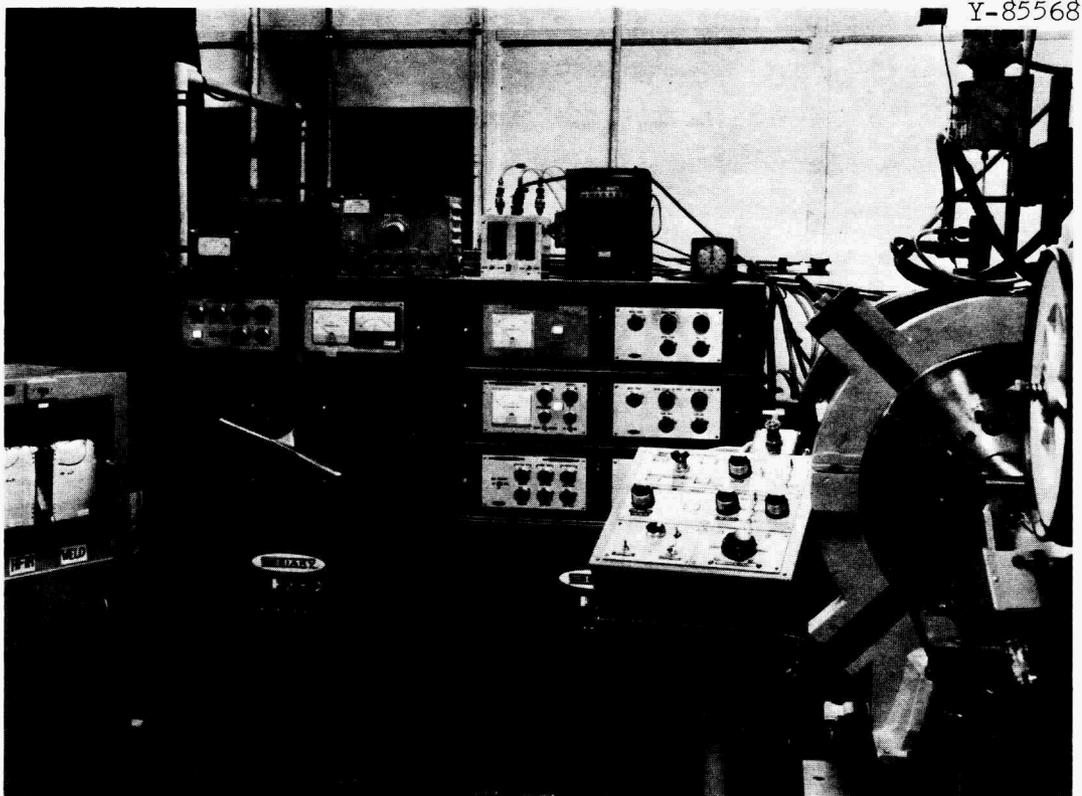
Welding Equipment Used for HFIR Fuel Element.
